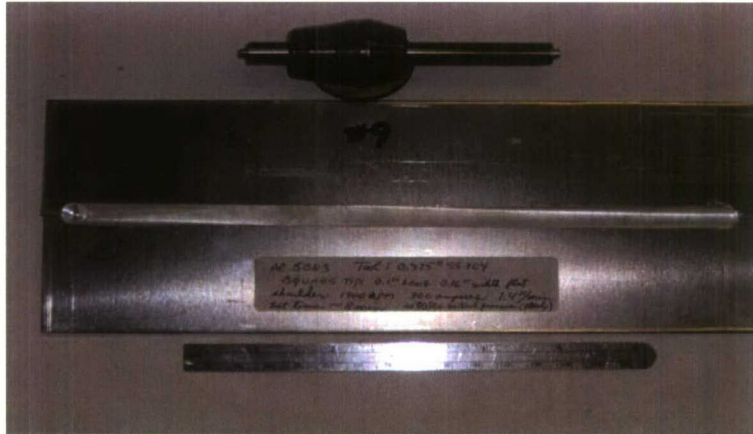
Electrically Assisted Friction Stir Weld (EAFSW) of 1/8-in Al 5083 Plate Showing also the 0.375-in diameter SS304 Tool. Z Force ~90 lbs (est.), 300 Amps Applied Current, 1300 rpm.
